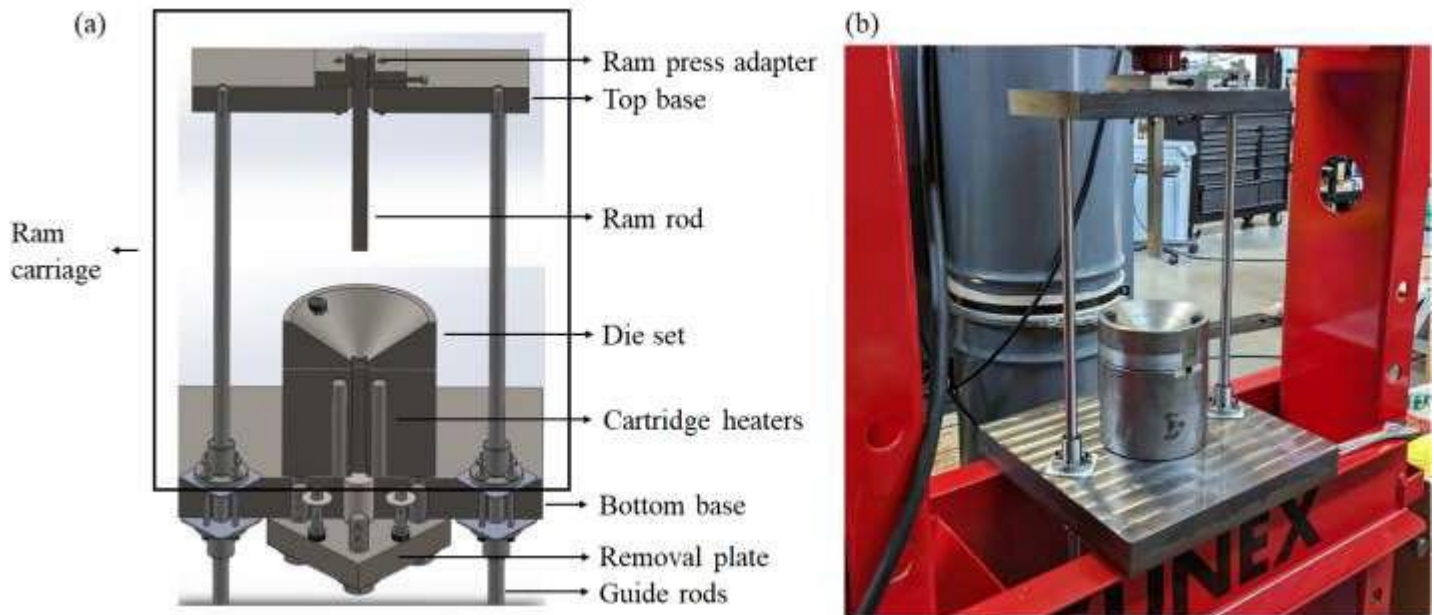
(a) Schematic of the chip compactor assembly cross-section mounted on the hydraulic press and (b) final assembled chip compactor
